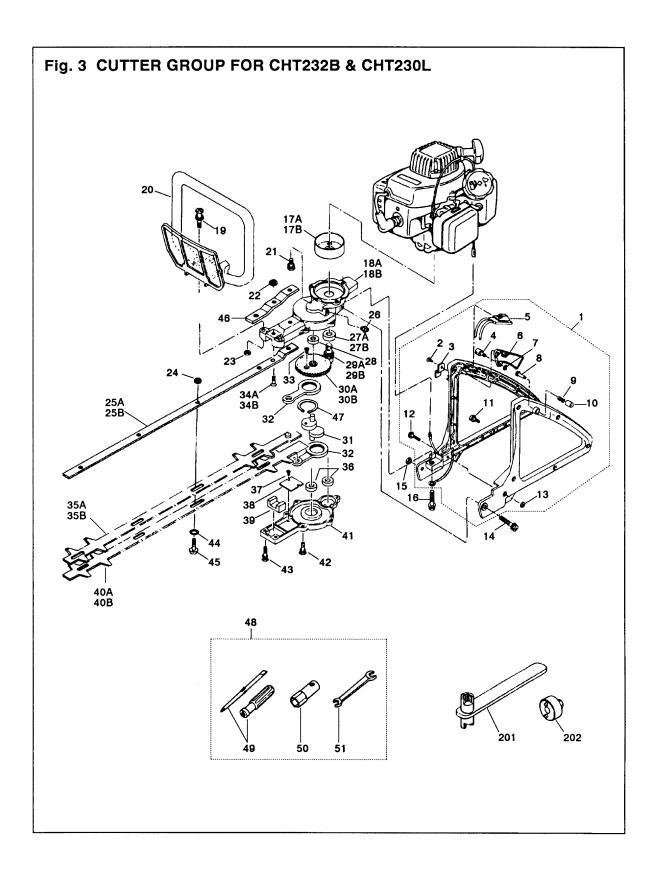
CUTTER GROUP FOR CHT232B & CHT232L
